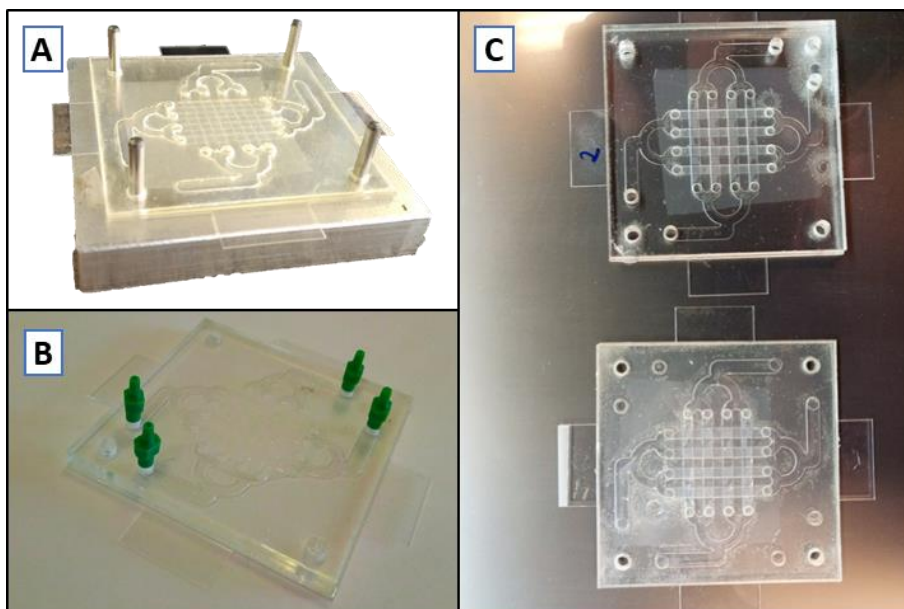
OOCv2.0 device assembly. A) OOC in the alignment block during the assembly process; B) Final OOC device assembled with green Mini-Luer® connectors; C) Optical clarity comparison between ARSeal 8026 PSA (Top) and 467MP (Bottom).
